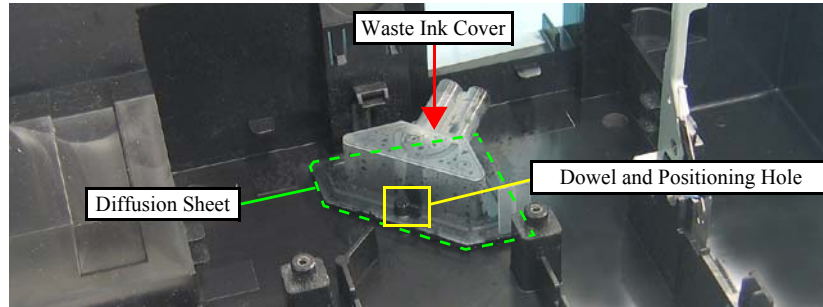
Removing the Waste Ink Cover and Diffusion Sheet
